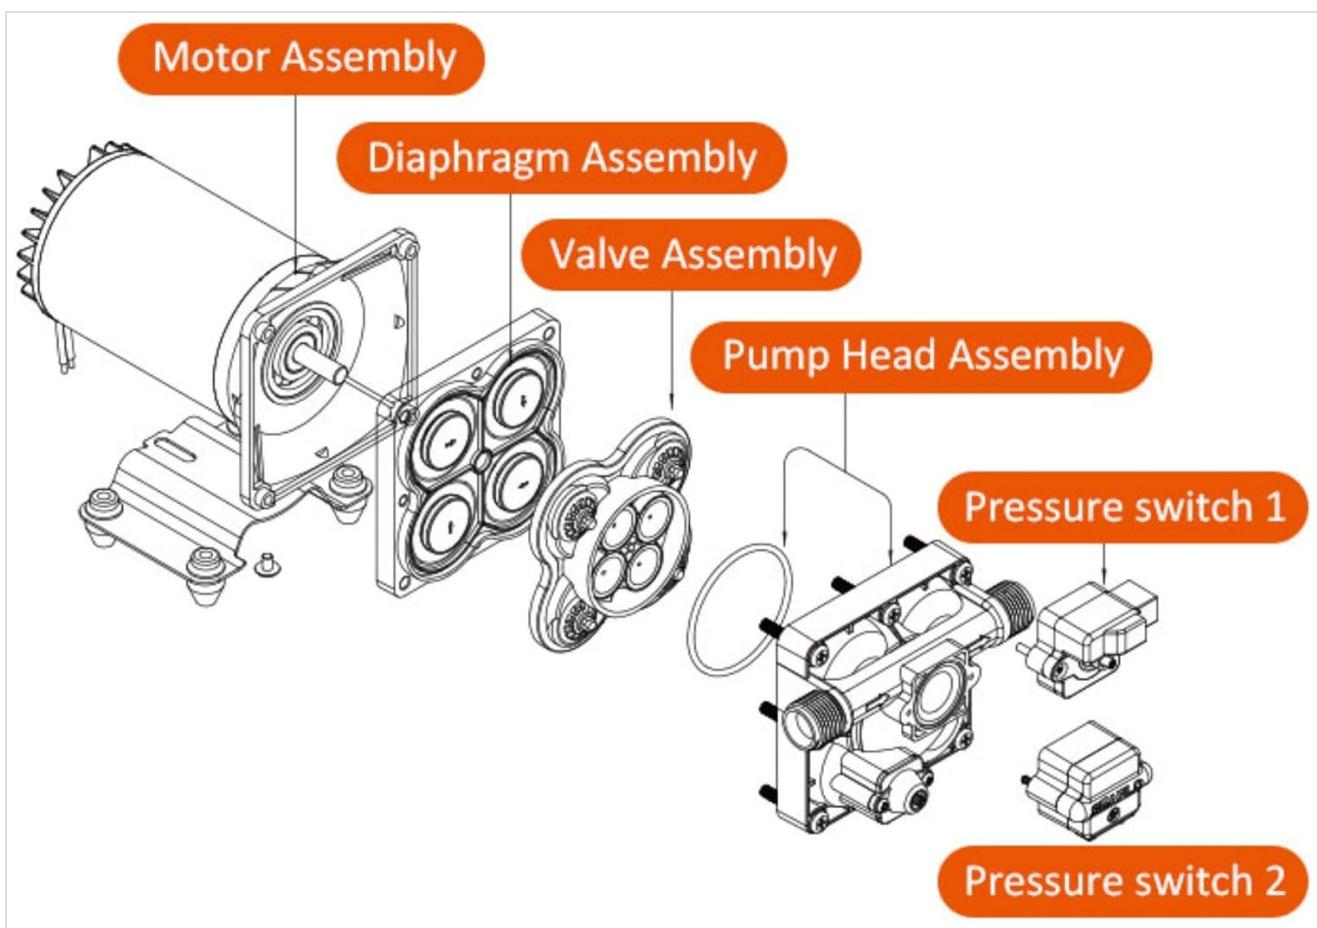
Exploded view showing the main assemblies of the pump: Motor, Diaphragm, Valve, Pump Head, and Pressure Switches.
